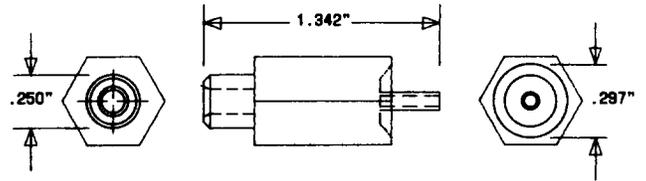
KS-21873, L1, Inserting Guide Bushing Tool
